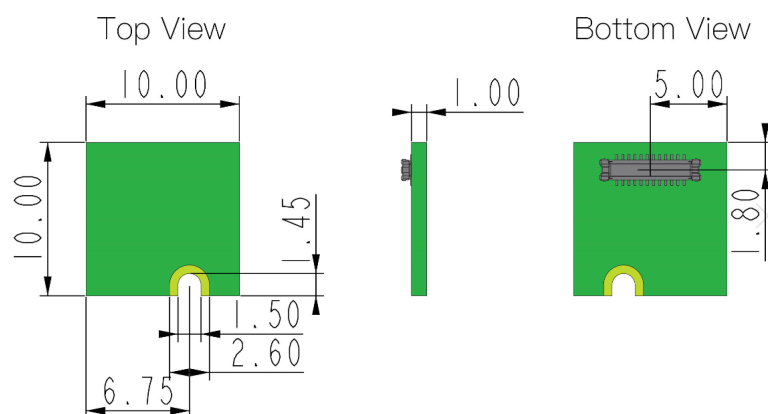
RAK1901 WisBlock Sensor Mechanic Drawing
